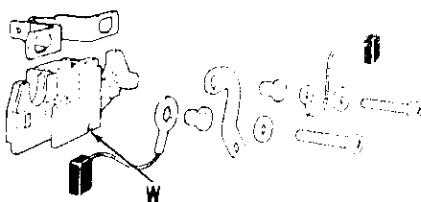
Exploded view of brush holder assembly. Insert wire in hole (W) to hold brushes up. Refer to text.
